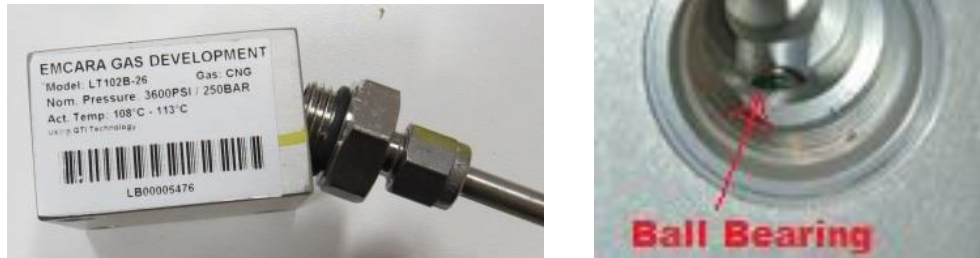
Left: Hold the PRD “label up” to trap the ball bearing in its bore. Right: Insert the ball bearing into the bore.
